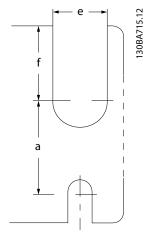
Top and Bottom Mounting Holes (B4, C3, C4)
